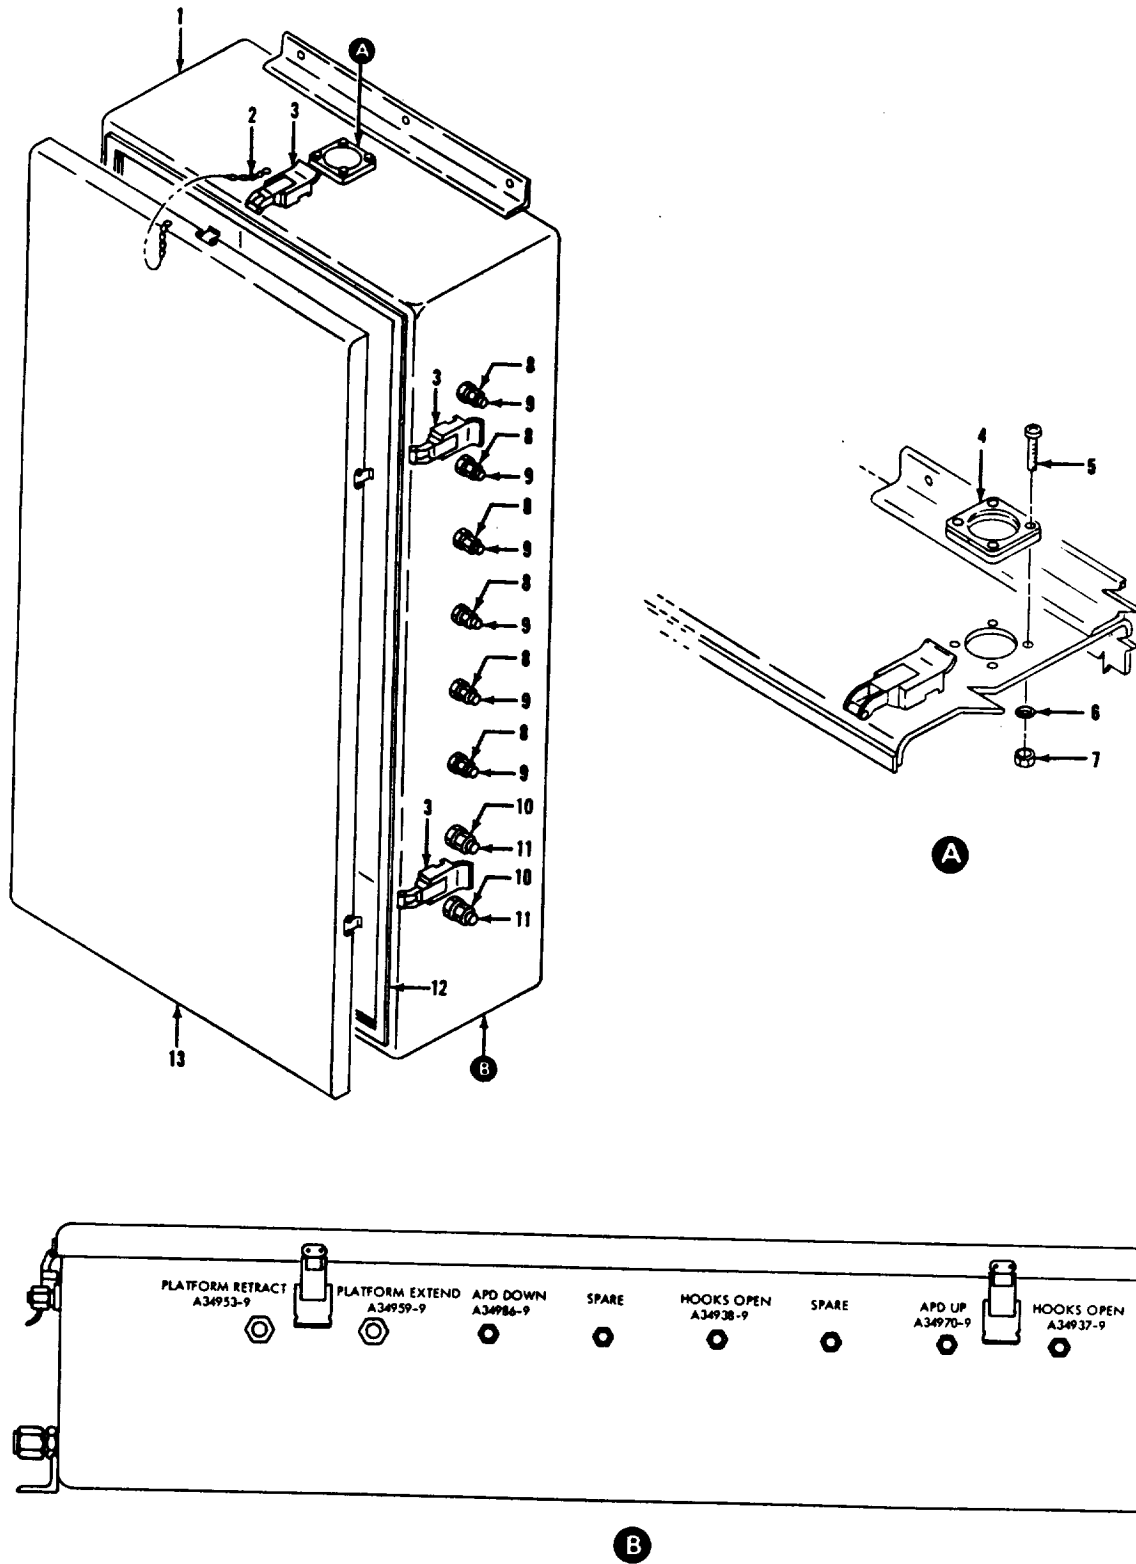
Pneumatic Box Assembly (Sheet 1 of 7)
